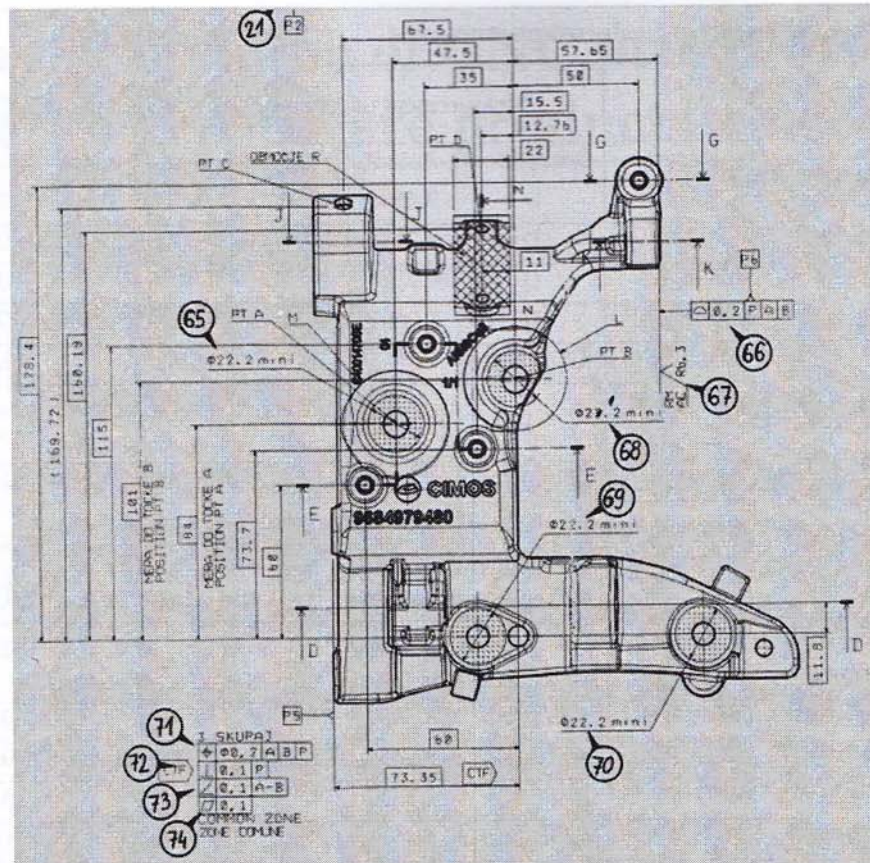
The complexity of the shape and control dimension of the front view of the product
